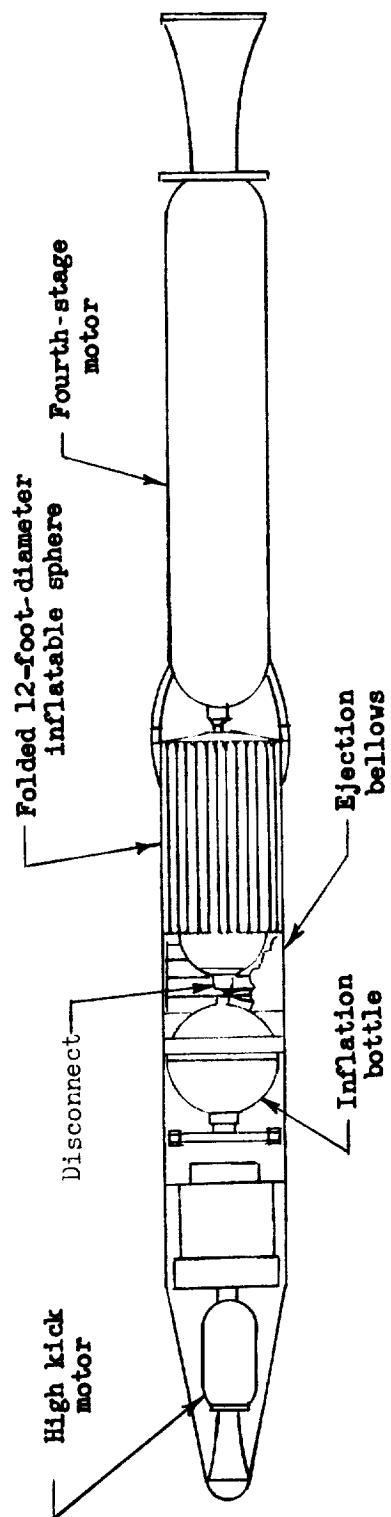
Fourth-stage rocket motor and payload assembly of the Jupiter-C payload package.
